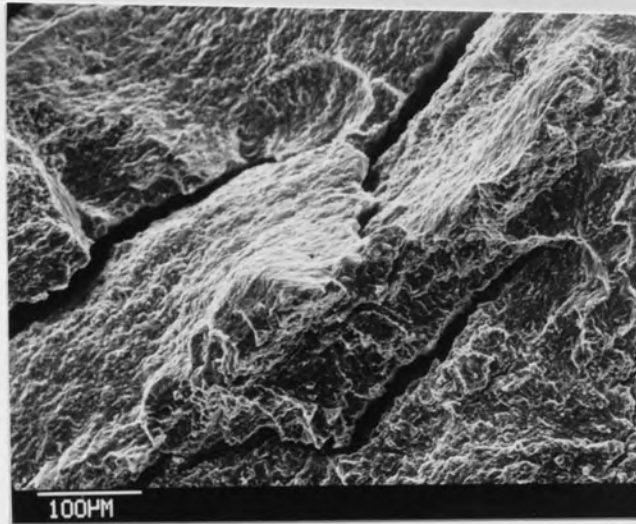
Fatigue fracture surface of CZ20-T6.
